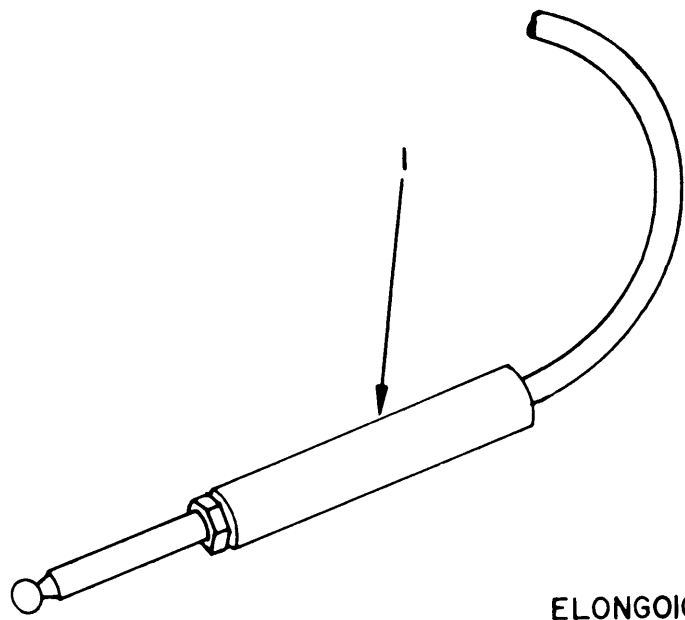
Cable Assembly, Telephone 4 Foot Long O/A
